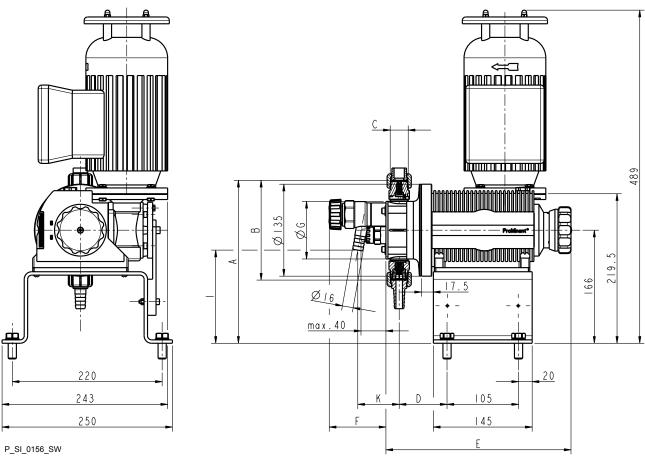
Dimensional drawing of Sigma/ 1, S1Ba, with EExde motor - Drawing is not strictly binding.
